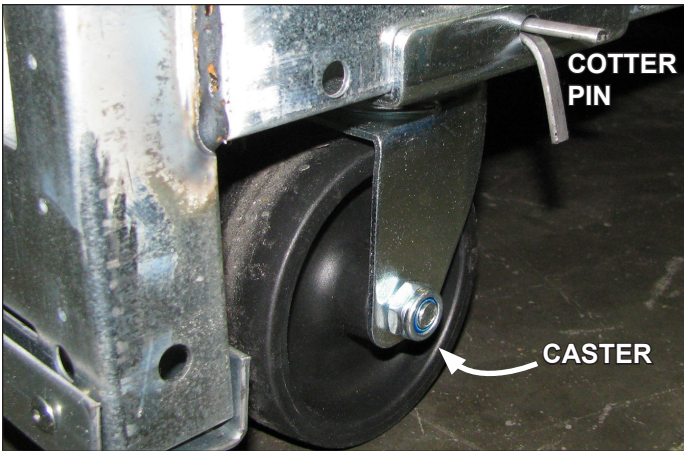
Removing the casters is an easy process. Simply flatten and remove the cotter pins that are holding the casters in place. Then lift the case with a "J" bar and slide the caster assemblies out. The dismantled casters can now be discarded.
